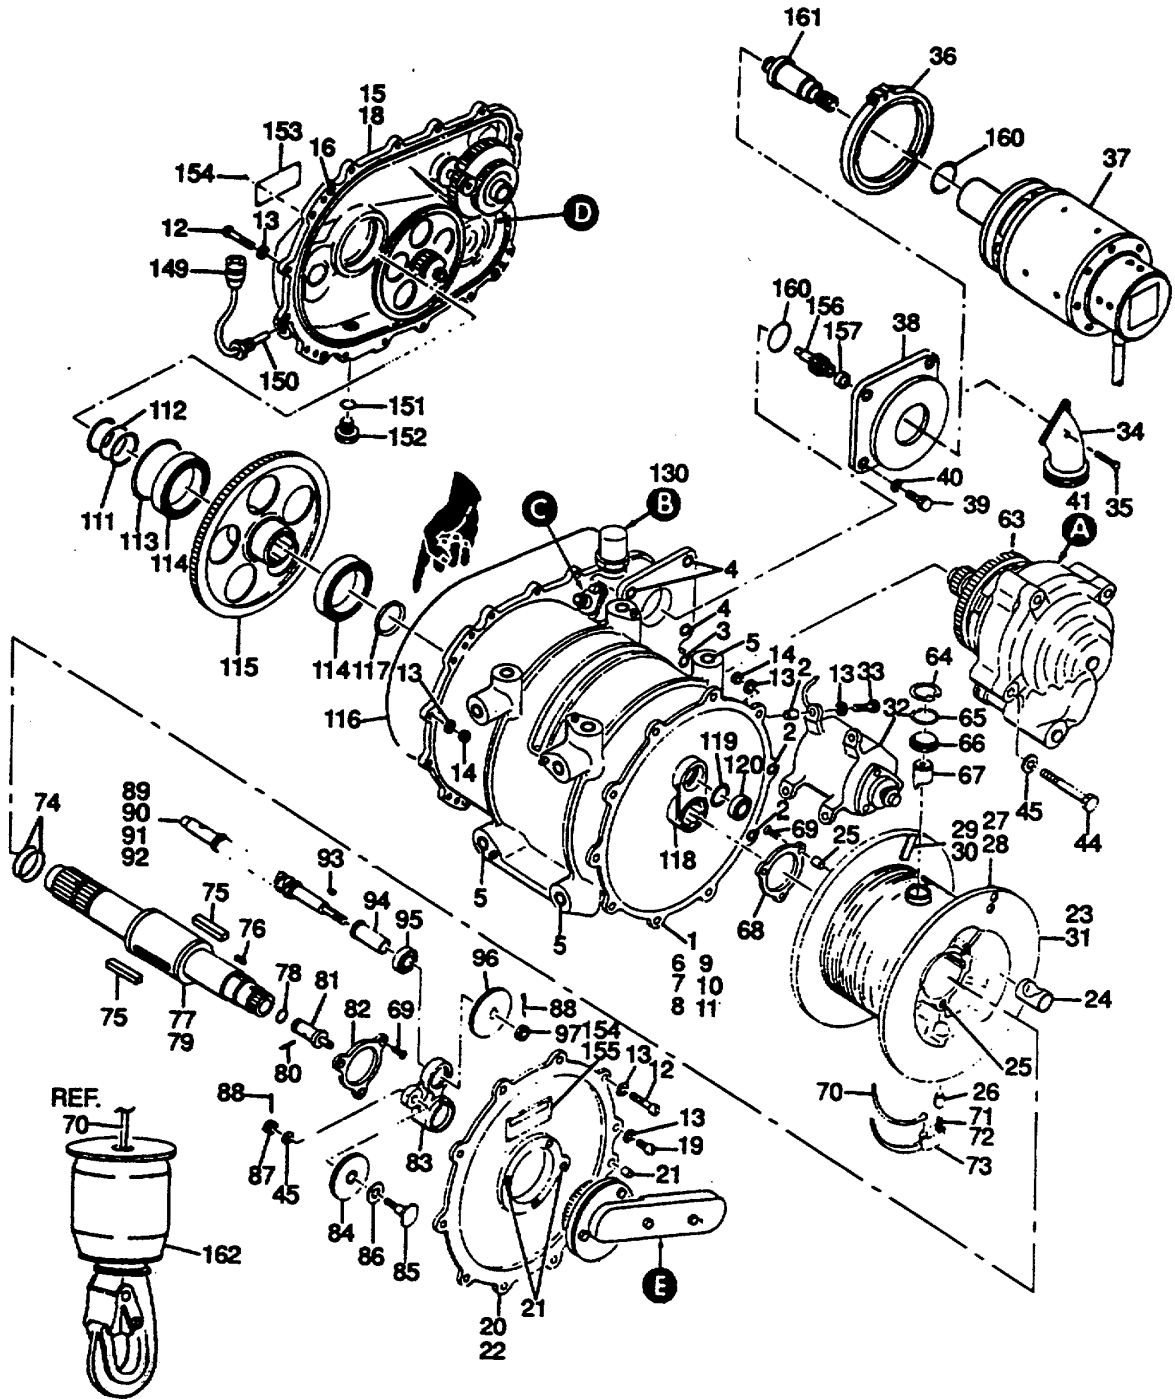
WINCH ASSY (SHEET 1 OF 3)
